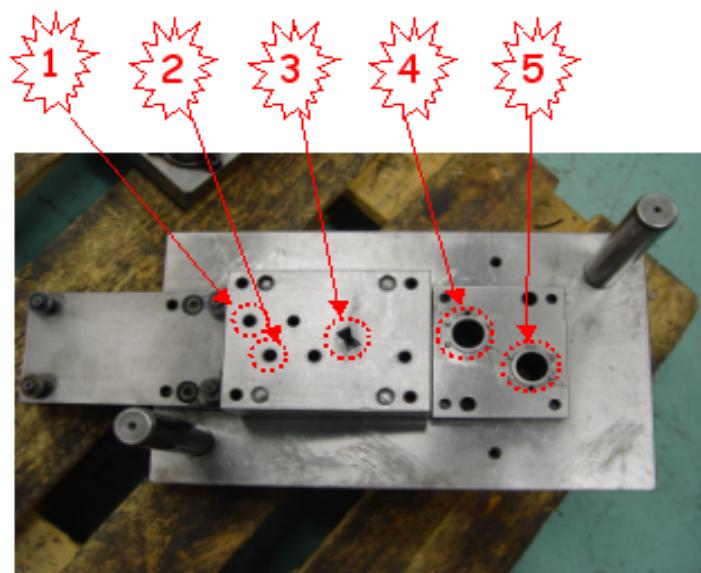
Position of the sensors in the tool for the production of the reference IA 04
